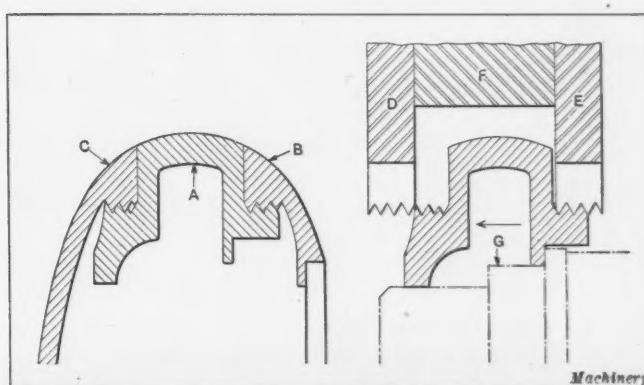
Use of Duplex Cutter for milling Very Short Threads close to a Shoulder
